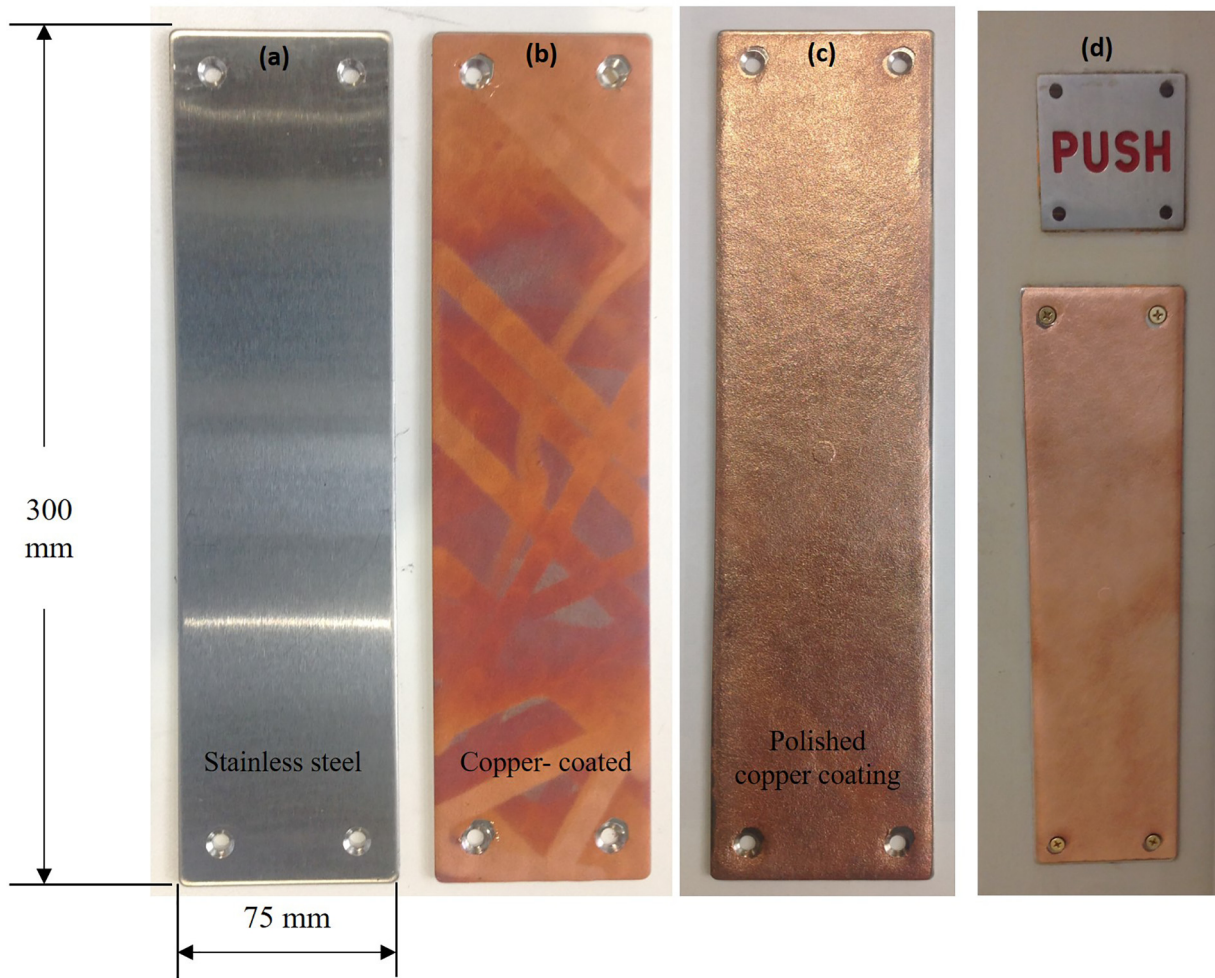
Macro-photograph of (a) an in-use stainless steel push plate, (b) copper coating on stainless steel push plate, (c) polished copper coating; and (d) copper-coated push plate installed on a door.
